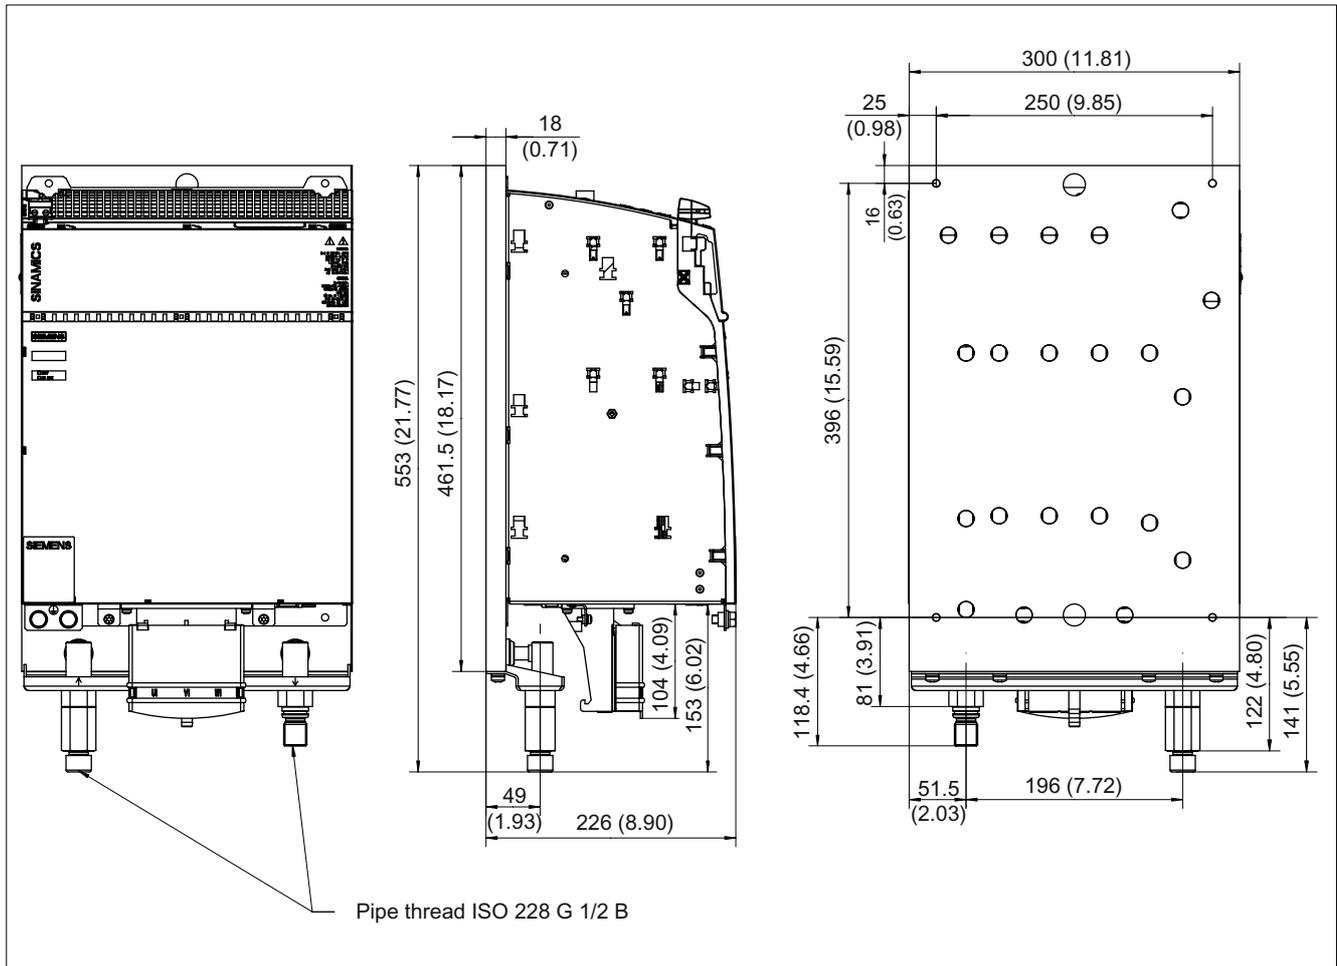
Dimension drawing of Active Line Module Liquid Cooled 120 kW, all dimensions in mm and (inches)
